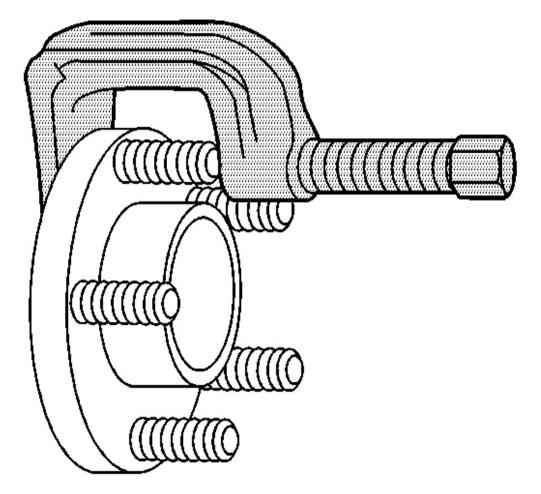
Removing The Wheel Stud From The Axle Flange Courtesy of GENERAL MOTORS CORP.
